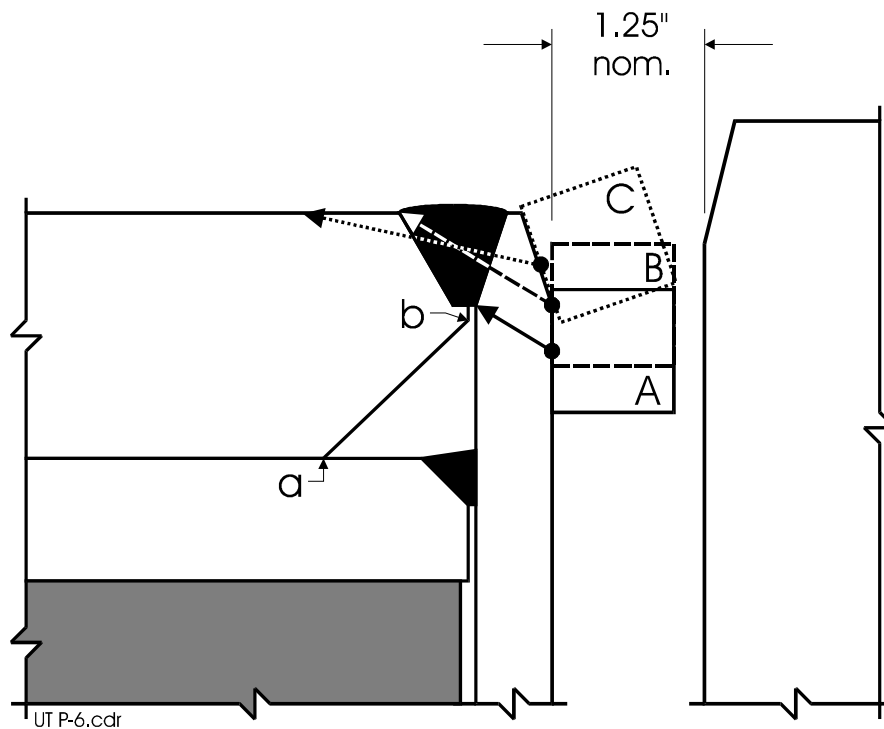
Outer Closure Plate Lower Chamfer and J-Bevel Weld Prep Nose Challenges to Straight Beam UT Examination
